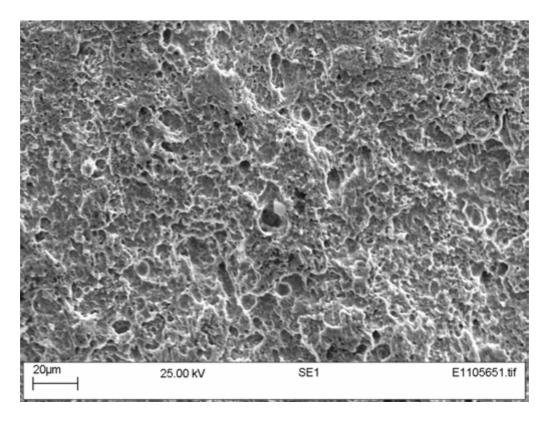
SEM fractograph, showing detail of figure 22 and fractography consistent with fatigue cracking.
